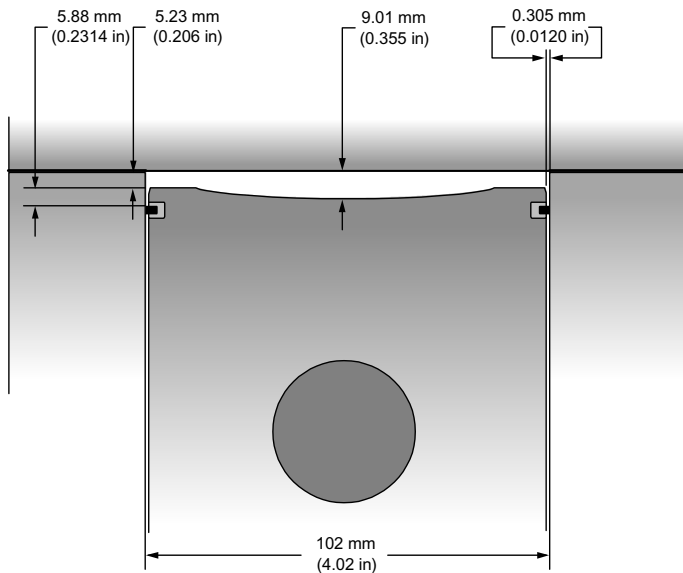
Schematic of the HCCI piston geometry and combustion chamber dimensions at TDC.
